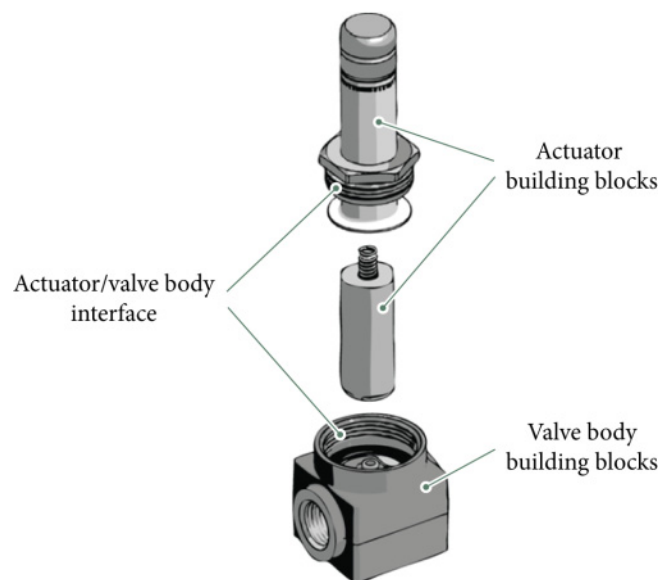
The division of the product into three groups of building blocks. This particular valve is a direct operated valve, i.e. a valve without diaphragm. The servo operated valves have a diaphragm assembly which considered being part of the valve building blocks.
